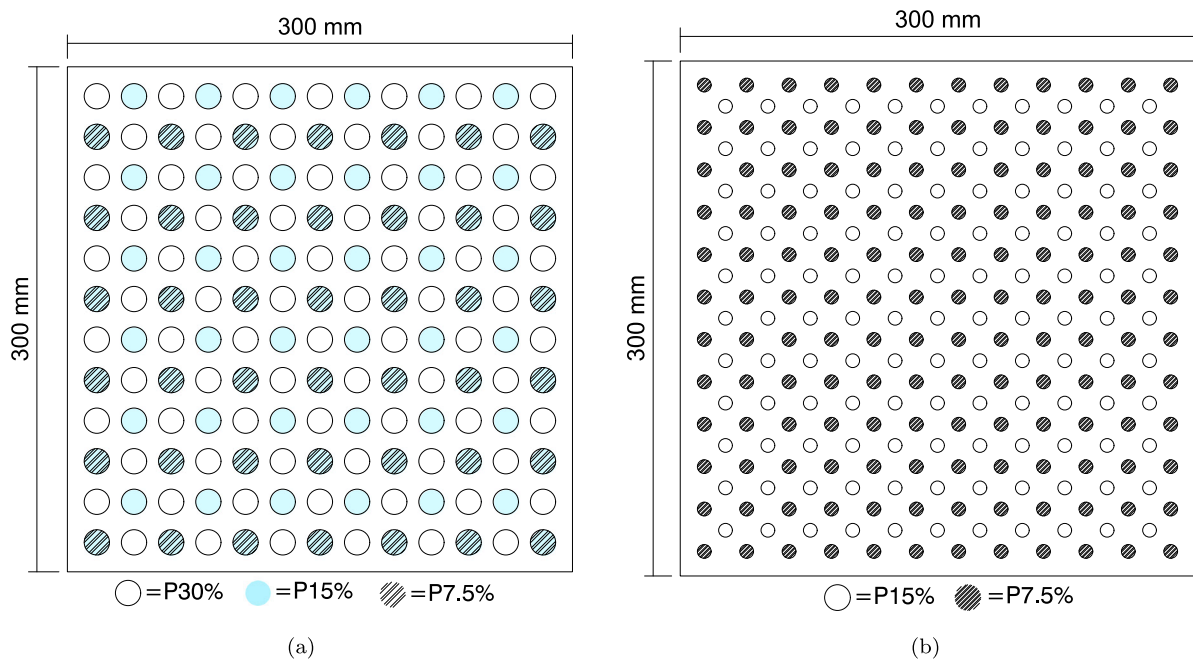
The array of holes in SPM: (a) 15 mm diameter and (b) 8 mm diameter.
